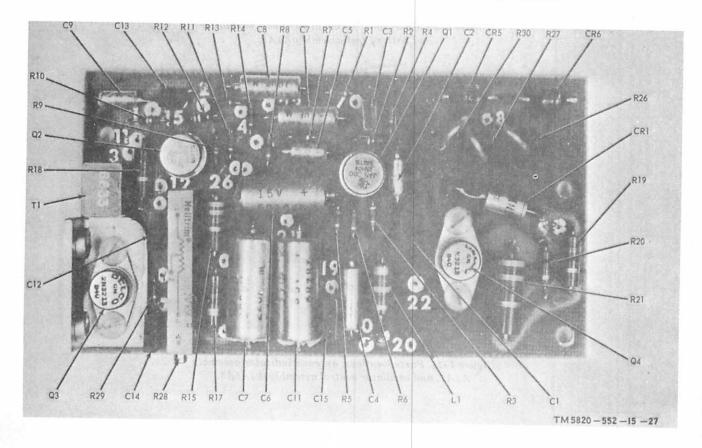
Parts locations, modulator and battery test assembly A4A2.
